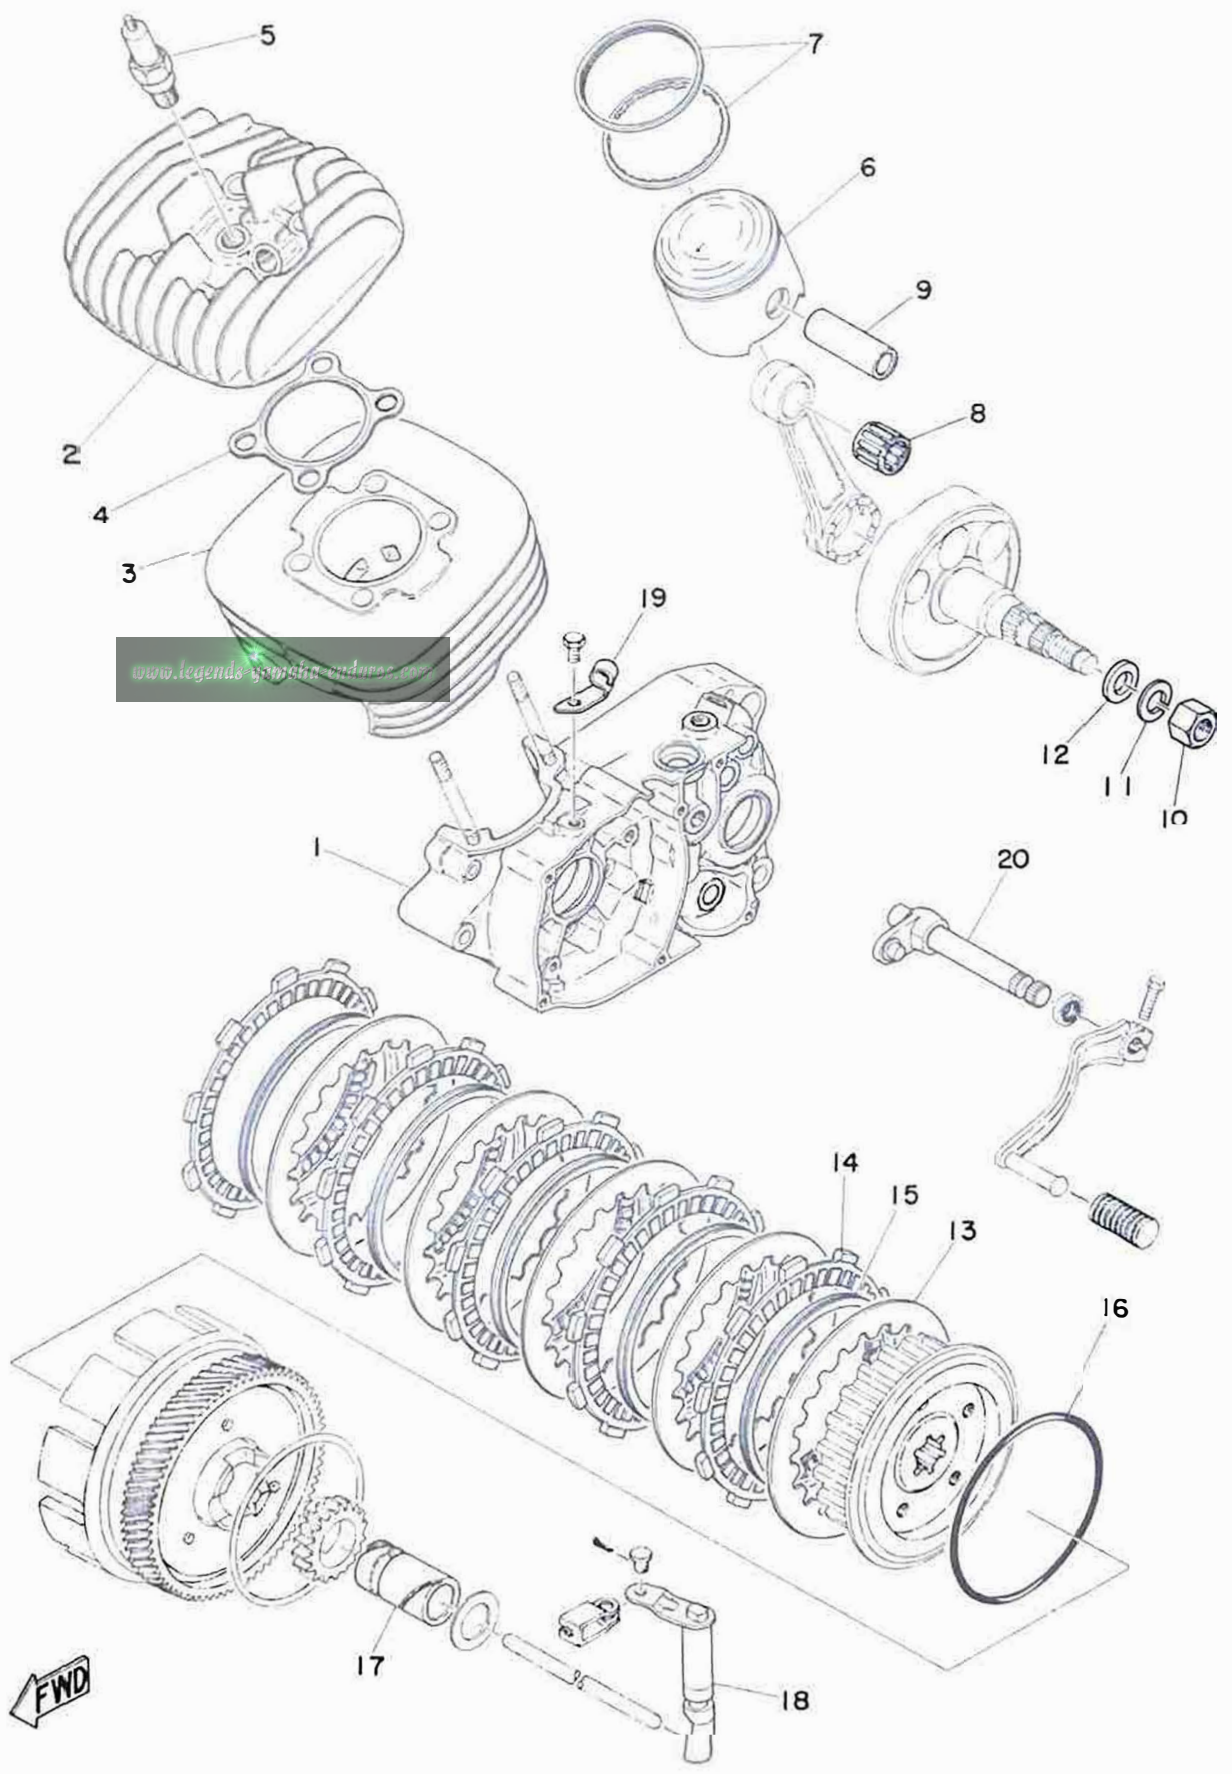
CRANKCASE · CYLINDER · PISTON · CLUTCH
